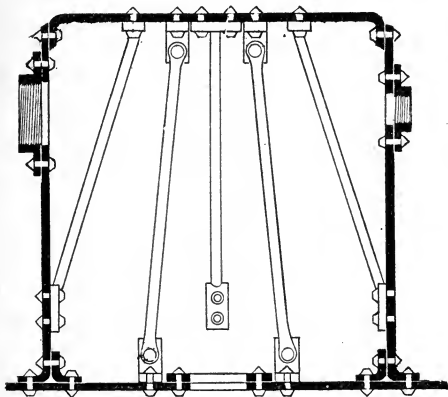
,965.—Steam dome with diagonal bracing and having steam and drain opening in shell.
